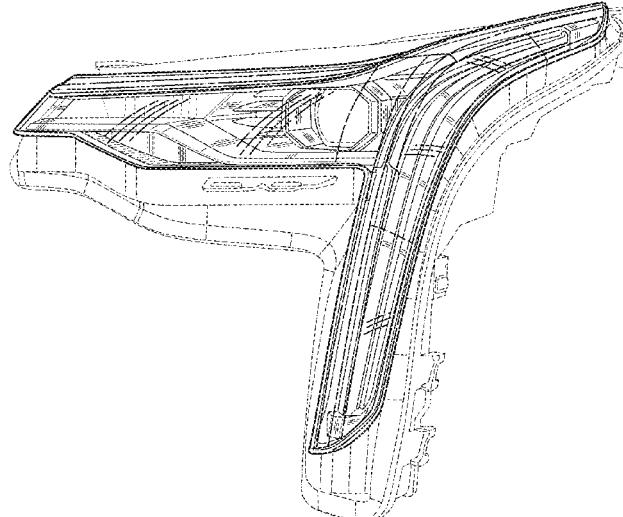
is a perspective view of another embodiment of the vehicle front headlamp;
